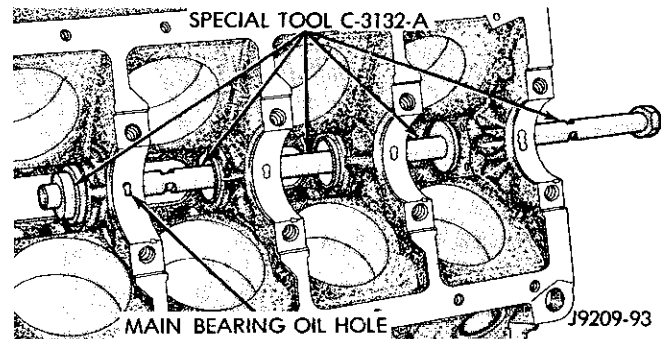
Camshaft Bearings Removal/Installation with Tool C-3132-A
